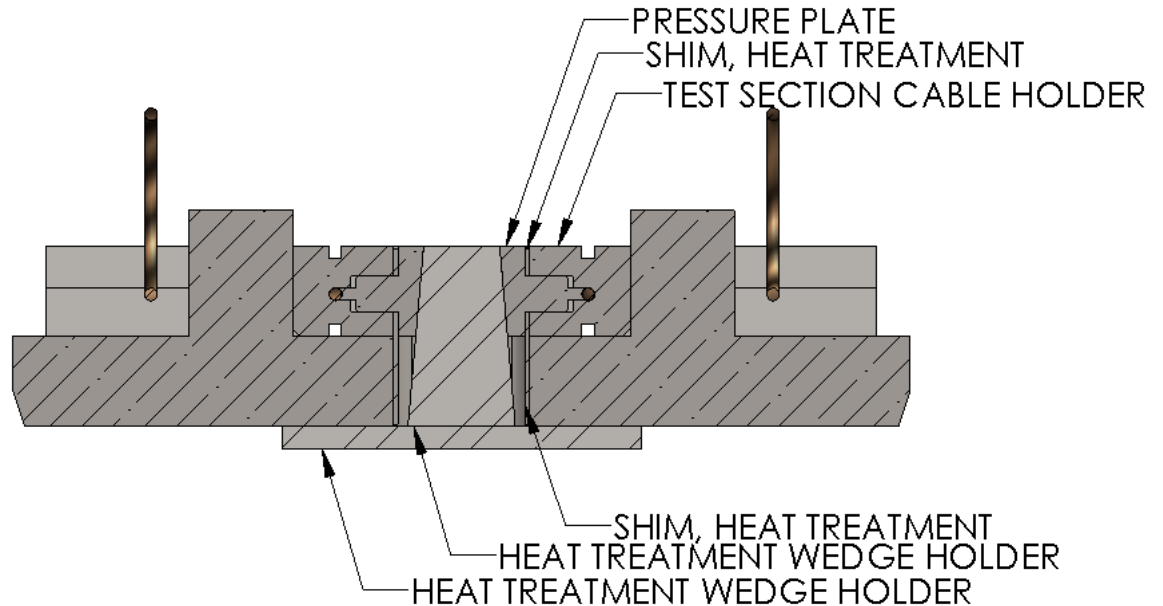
Insert the pressure plates, making sure the cable is secure in the groove. Insert the top and bottom shims prior to inserting the heat treatment wedge holder.
